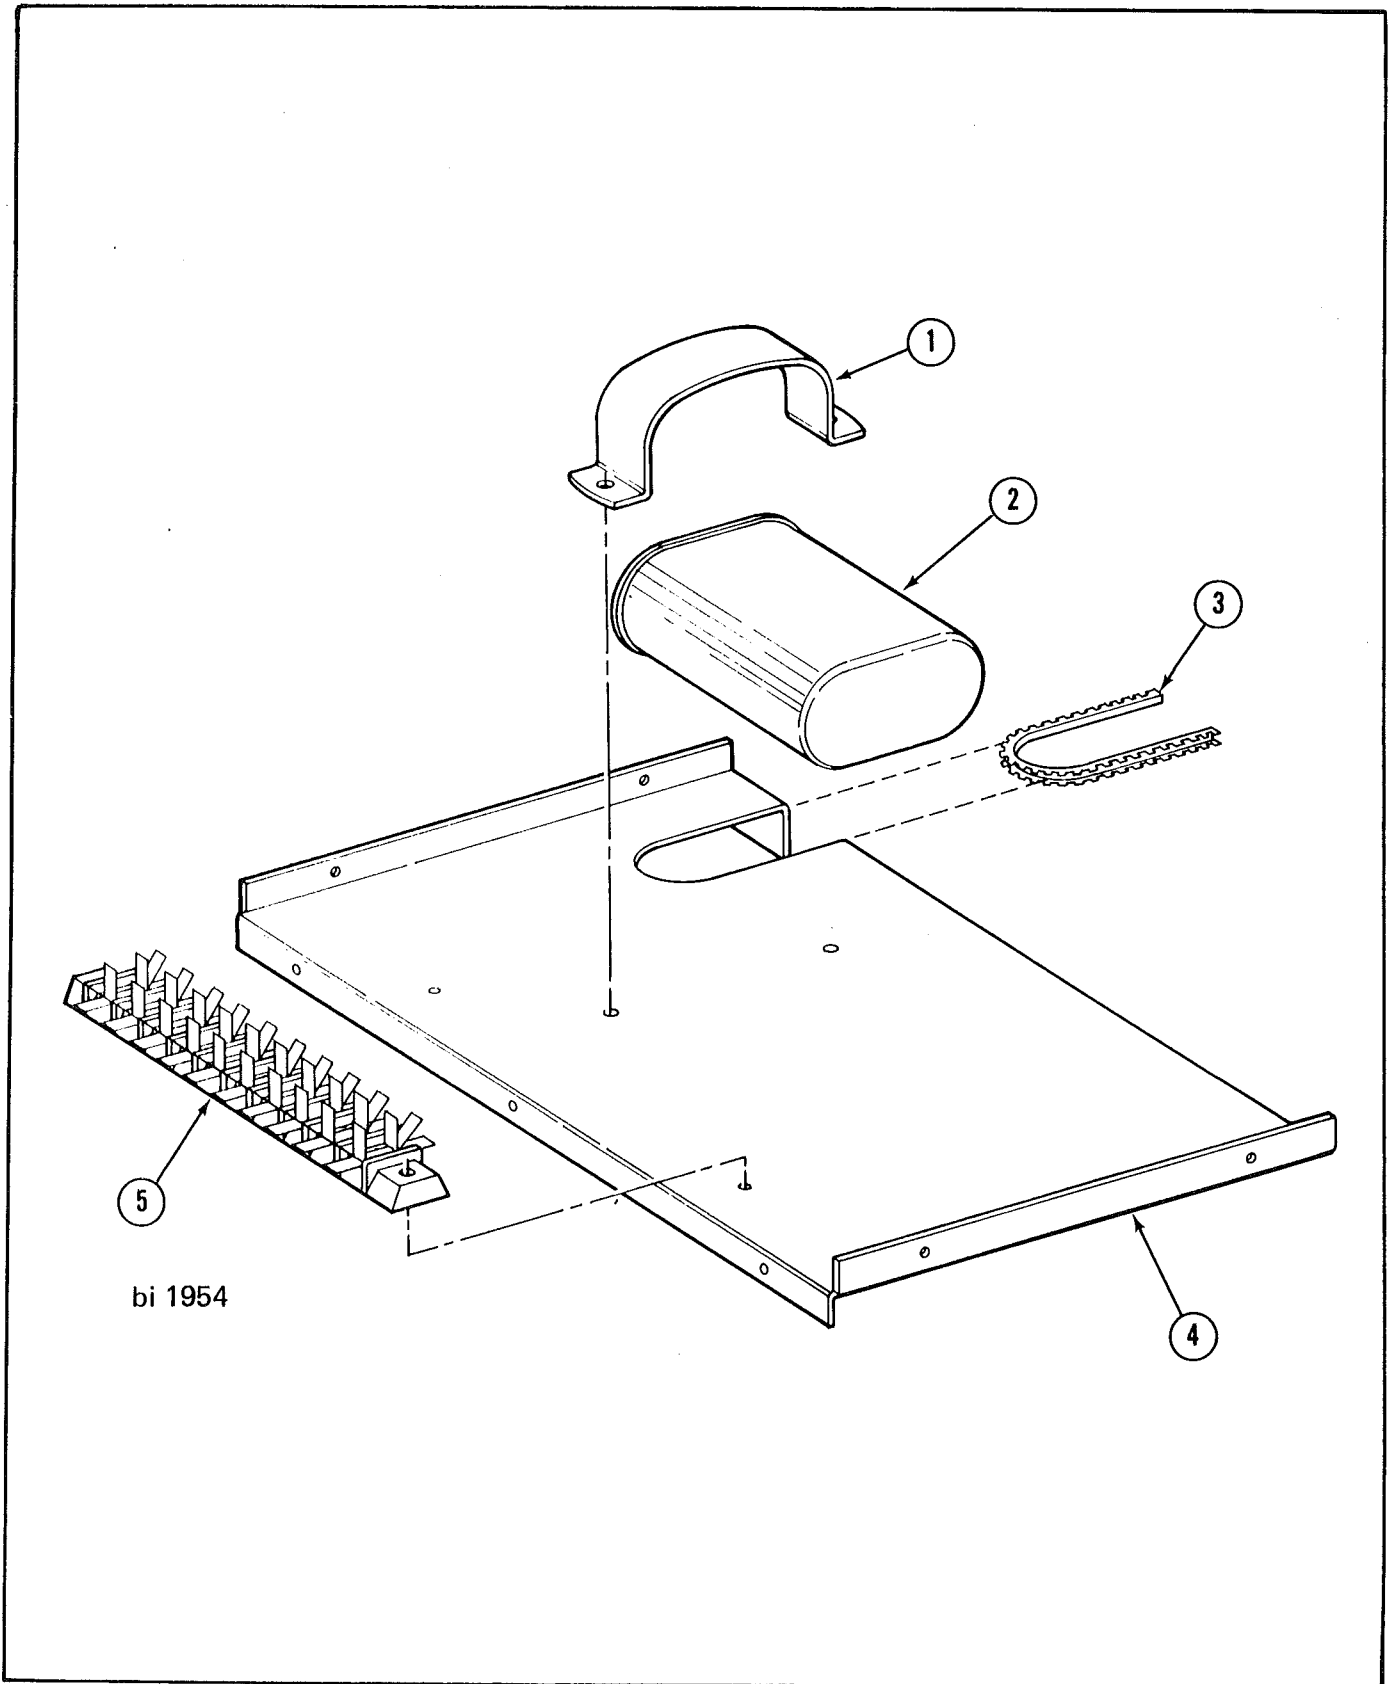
BRACKET ASSEMBLY, SHIELD
